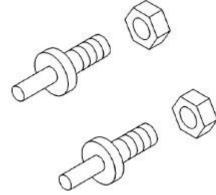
PINS, ADAPTER - 8346 Courtesy of CHRYSLER LLC
